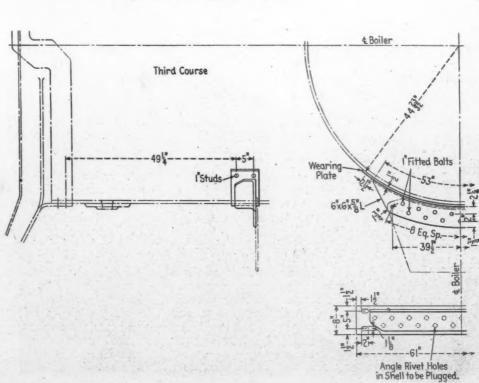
Application of wear plate to the boiler shell which eliminates cracking of the shell course without eliminating the waist sheet
